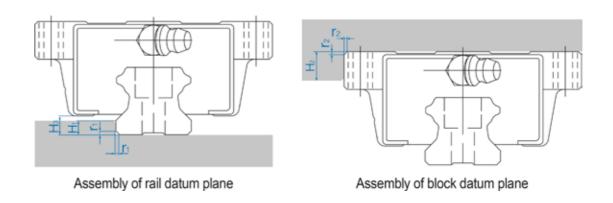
DIMENSION OF CONTACT DATUM PLANE
